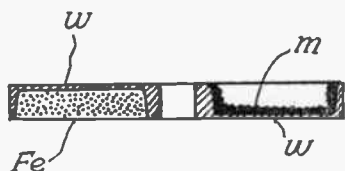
Showing moulding which combines the features of 34C and 35B.
